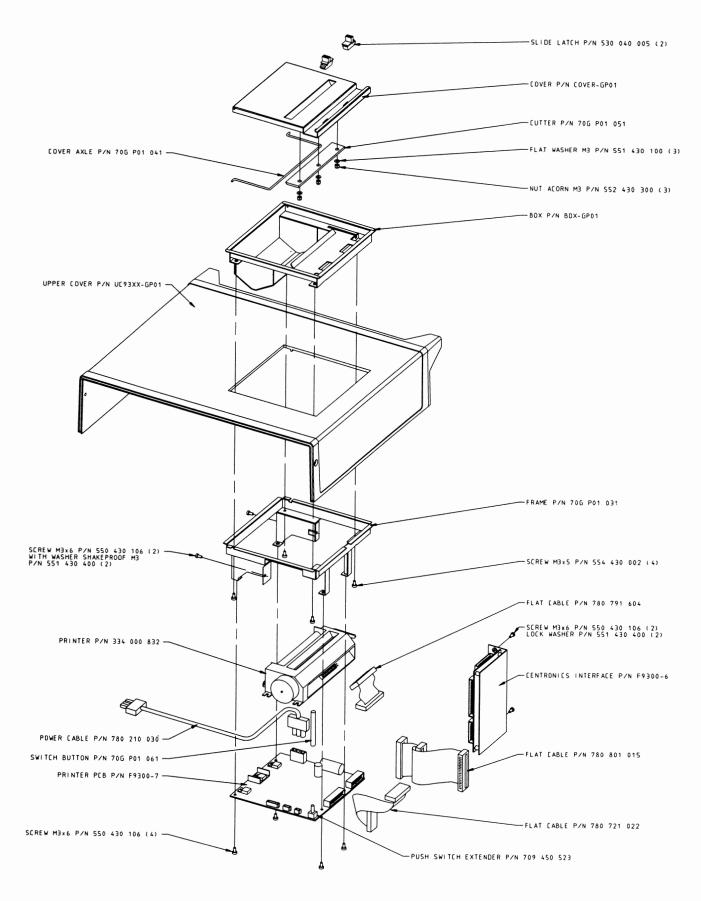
9320-GP01 ASSEMBLY: PRINTER OPTION
